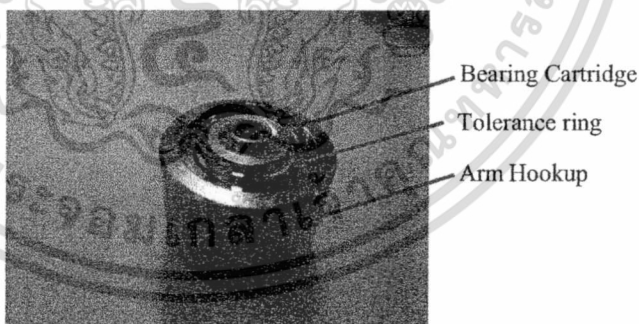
Assembly of arm hookup, tolerance ring and bearing cartridge
